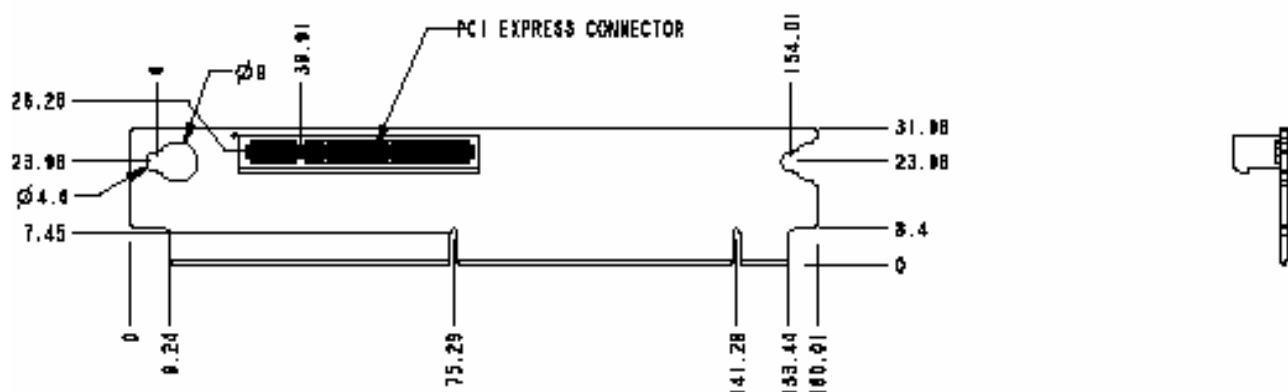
1U Full Height PCI-Express Riser Card Mechanical Drawing
